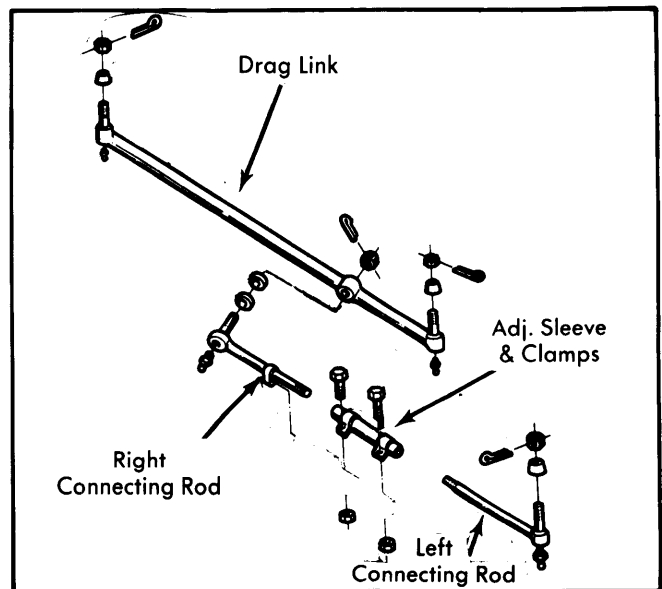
Disassembled View of Steering Linkage (E100-350, F100-350)
